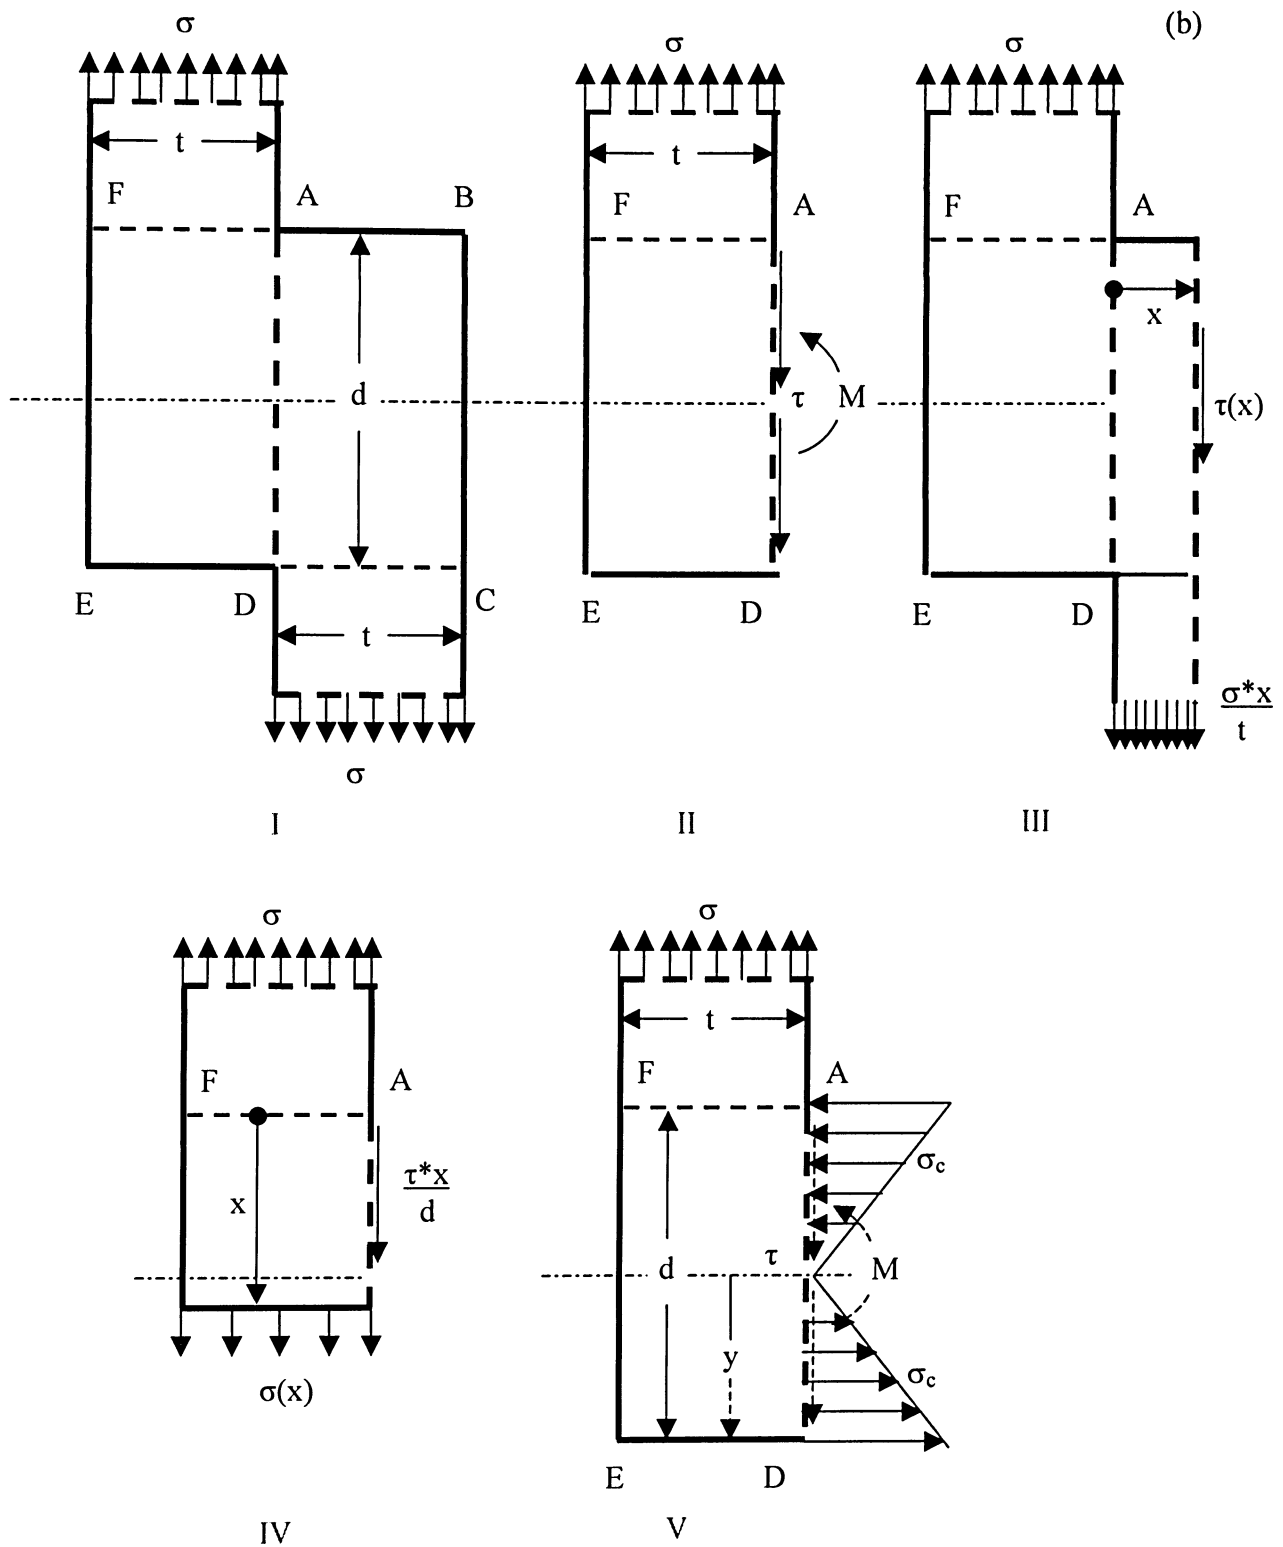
Stress analysis in the nugget. (a) View in the spot weld direction; (b) Side view perpendicular to the spot weld direction.
